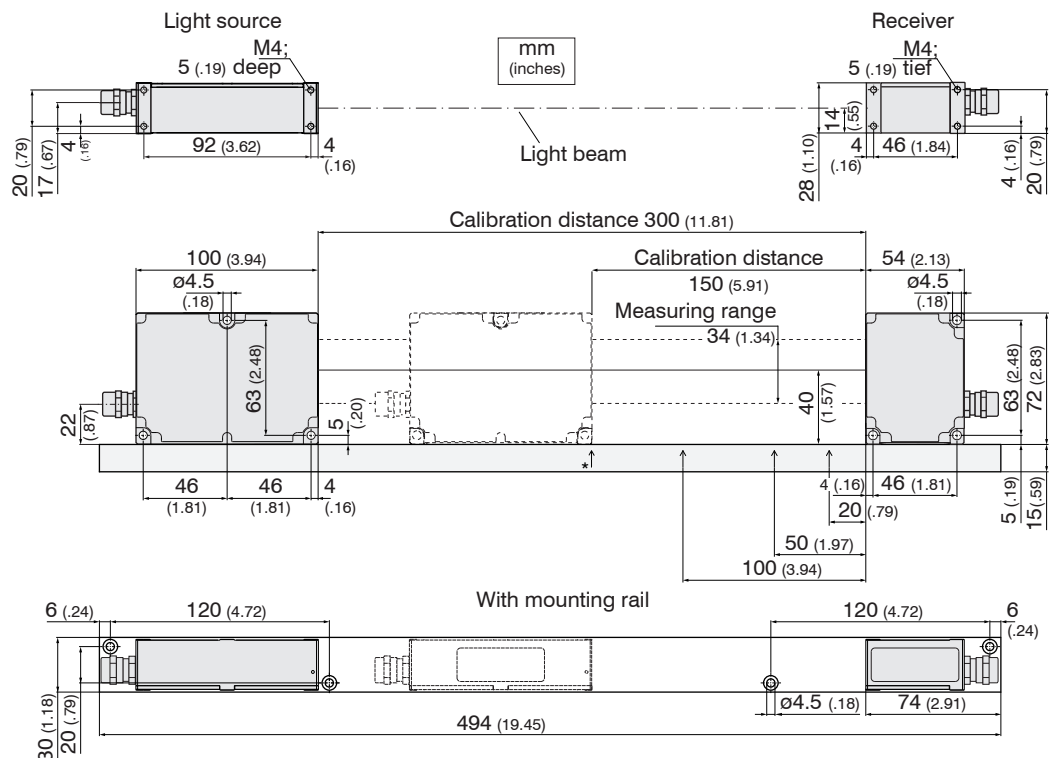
Dimensional drawing sensor unit, dimensions in mm (inches), not to scale
